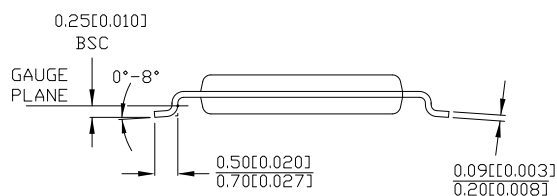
8-Pin Thin Shrink Small Outline Package (4.40 MM Body) Z8
